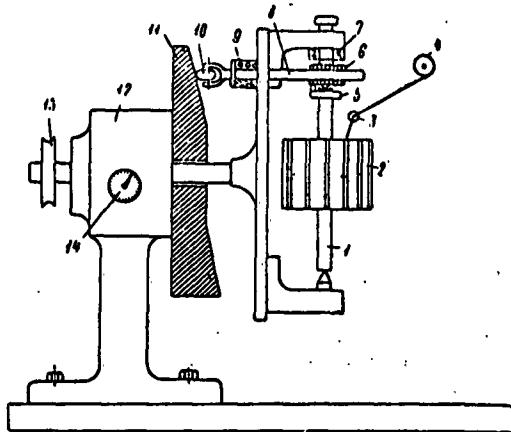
Schematic diagram of the machine with a winding cam plate.
